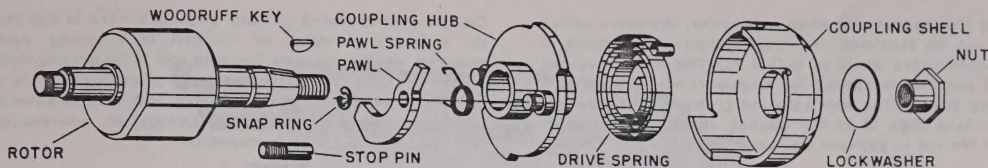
Magnetic Rotor and Disassembled Impulse Coupling
